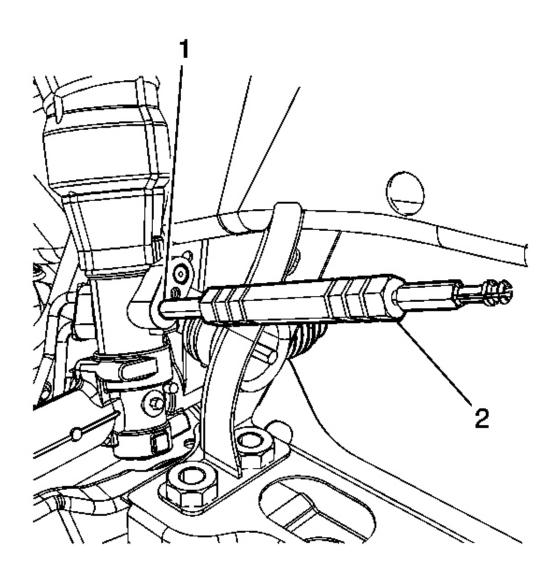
Installing Replacement Steering Gear Oil Seal Courtesy of GENERAL MOTORS CORP.
